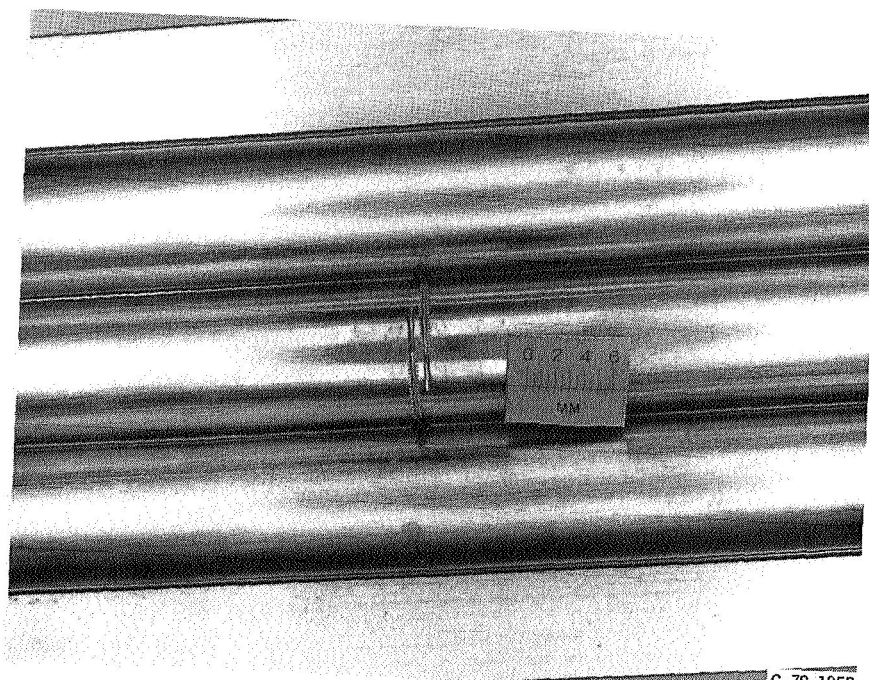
Thermocouples in place in heat-flux-meter center coolant tube shell prior to assembly brazing.
